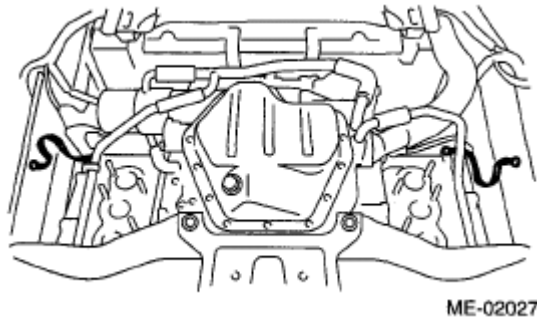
Identifying Front Cushion Rubber Mounting Bolts And Locator
